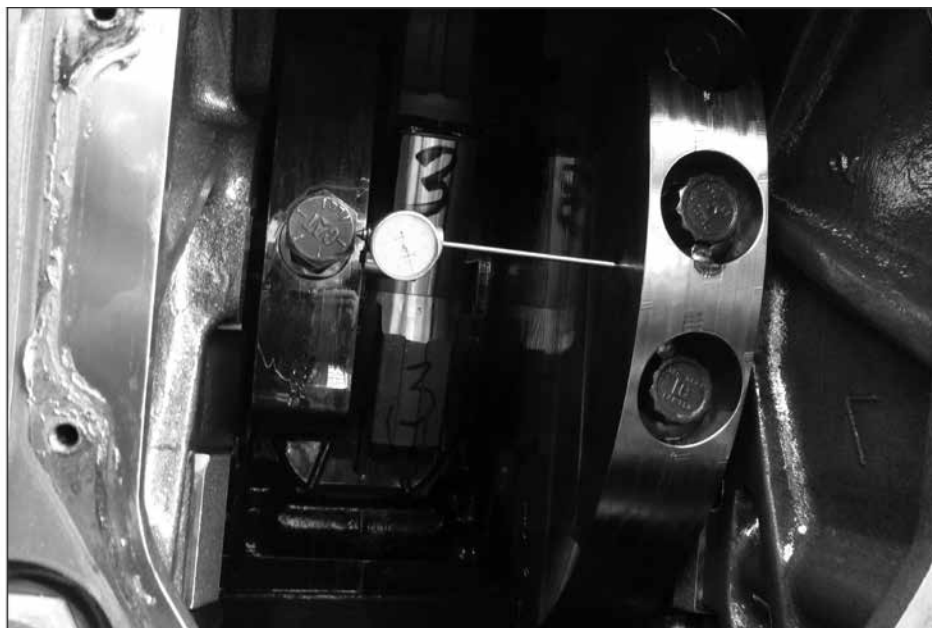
Checking In-line Engine Crankshaft Deflection
